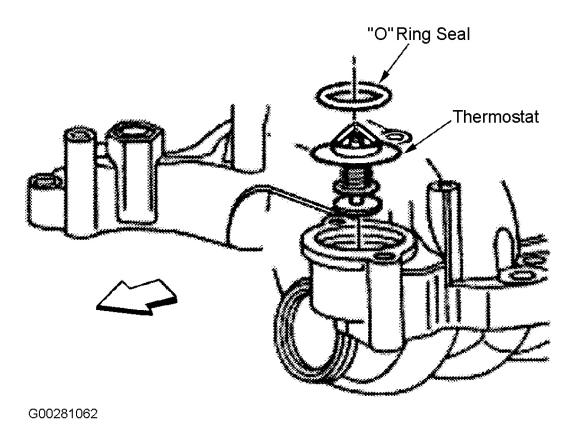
Removing/Installing Thermostat Courtesy of FORD MOTOR CO.
